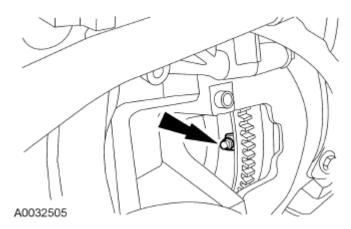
Locating Starter Motor Isolator Courtesy of FORD MOTOR CO.
